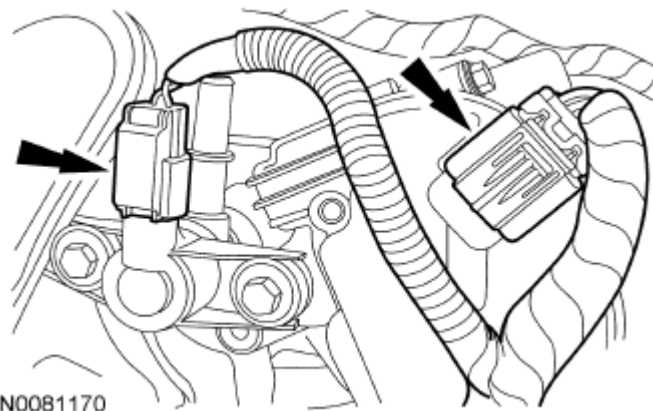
Locating Electronic Throttle Control & Evaporative Emission Canister Purge Valve Electrical Connectors
